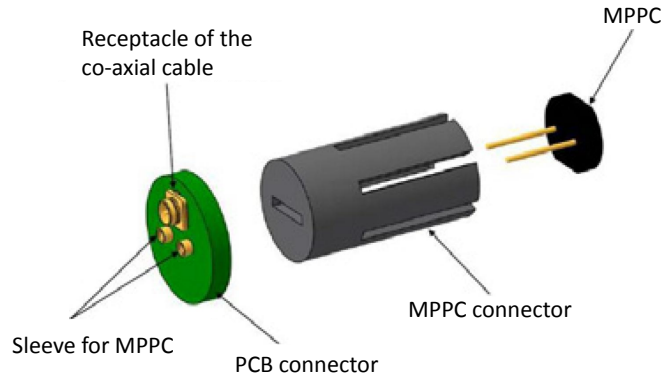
Printed Circuit Board (PCB) connector. The MPPC is electrically connected to the cable via PCB.
